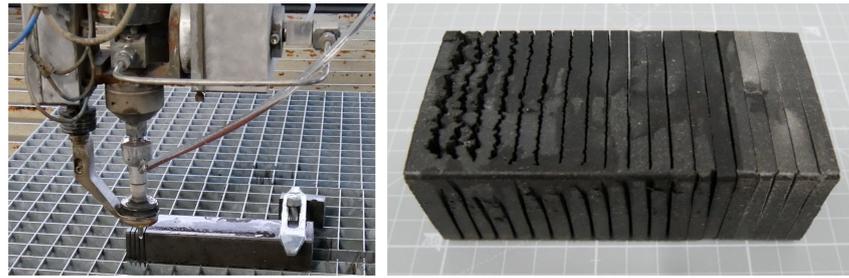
Clamping the workpiece on the table of the AWJ machine, divided profile—a semi-finished product.
